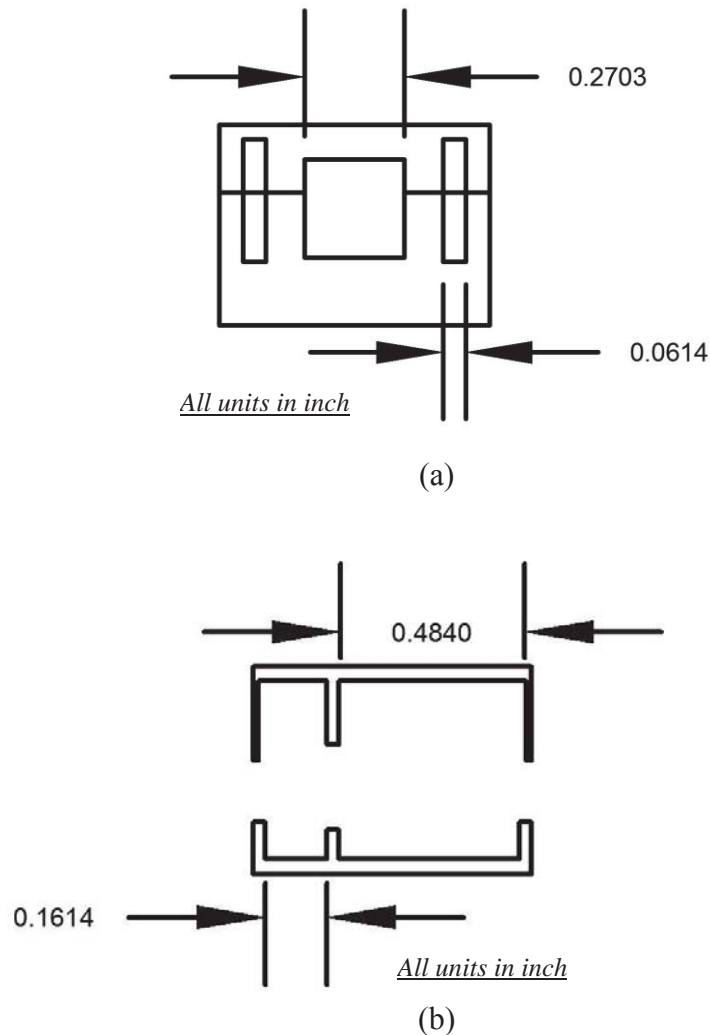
Layouts of the Cirlex fixtures for chip and solder preforms (a) and lead frame (b) (see Table B.(19) for the original files).
